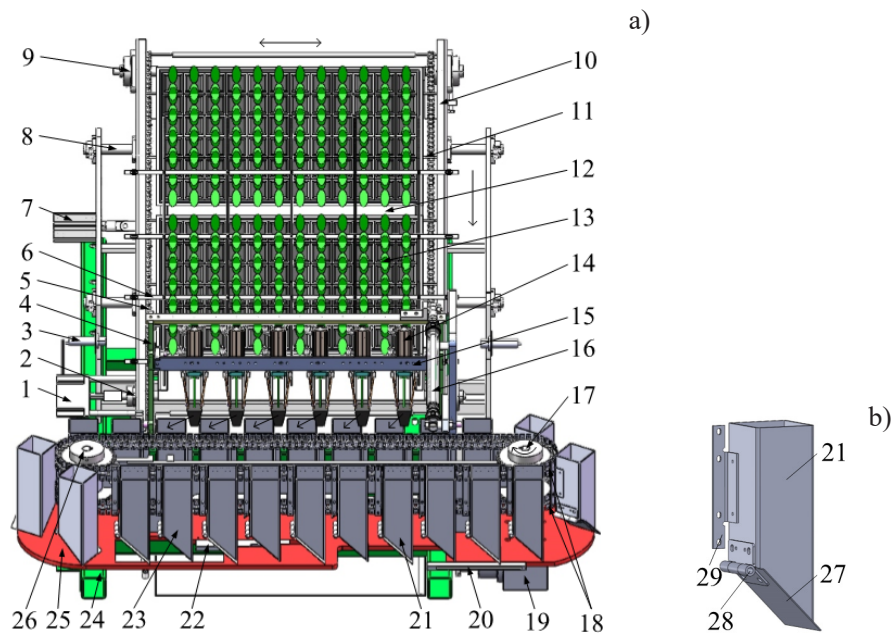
The structure schematics of the seedling feeding and rotation discharging mechanisms: 1) motor; 2 & 17) driving chain wheel; 3) photoelectric sensor; 4) rocker; 5 & 18) chain; 6) pressing trays rail; 7 & 16) cylinder; 8) slide bar; 9 & 26) driven chain wheel; 10) leading plate; 11) beam; 12) pallet; 13) plug seedling; 14) gripper; 15) crossbeam; 19) gear dividing box; 20) outer block beam; 21) outer opening hopper; 22) inner block beam; 23) inner opening hopper; 24) frame; 25) support plate; 27) end cover; 28) shaft; 29) connecting piece.
